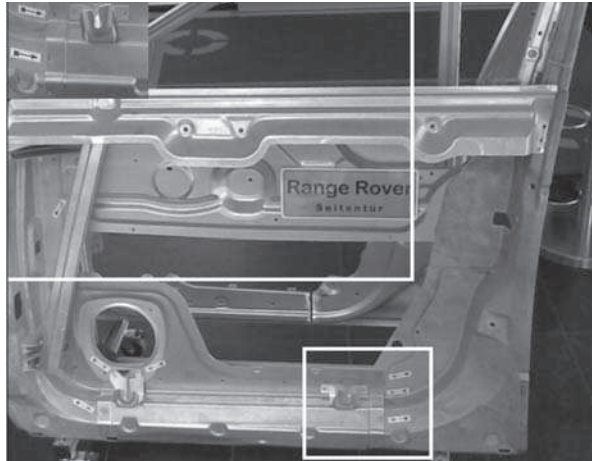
Assembled car doors using the solid self-piercing rivet.
